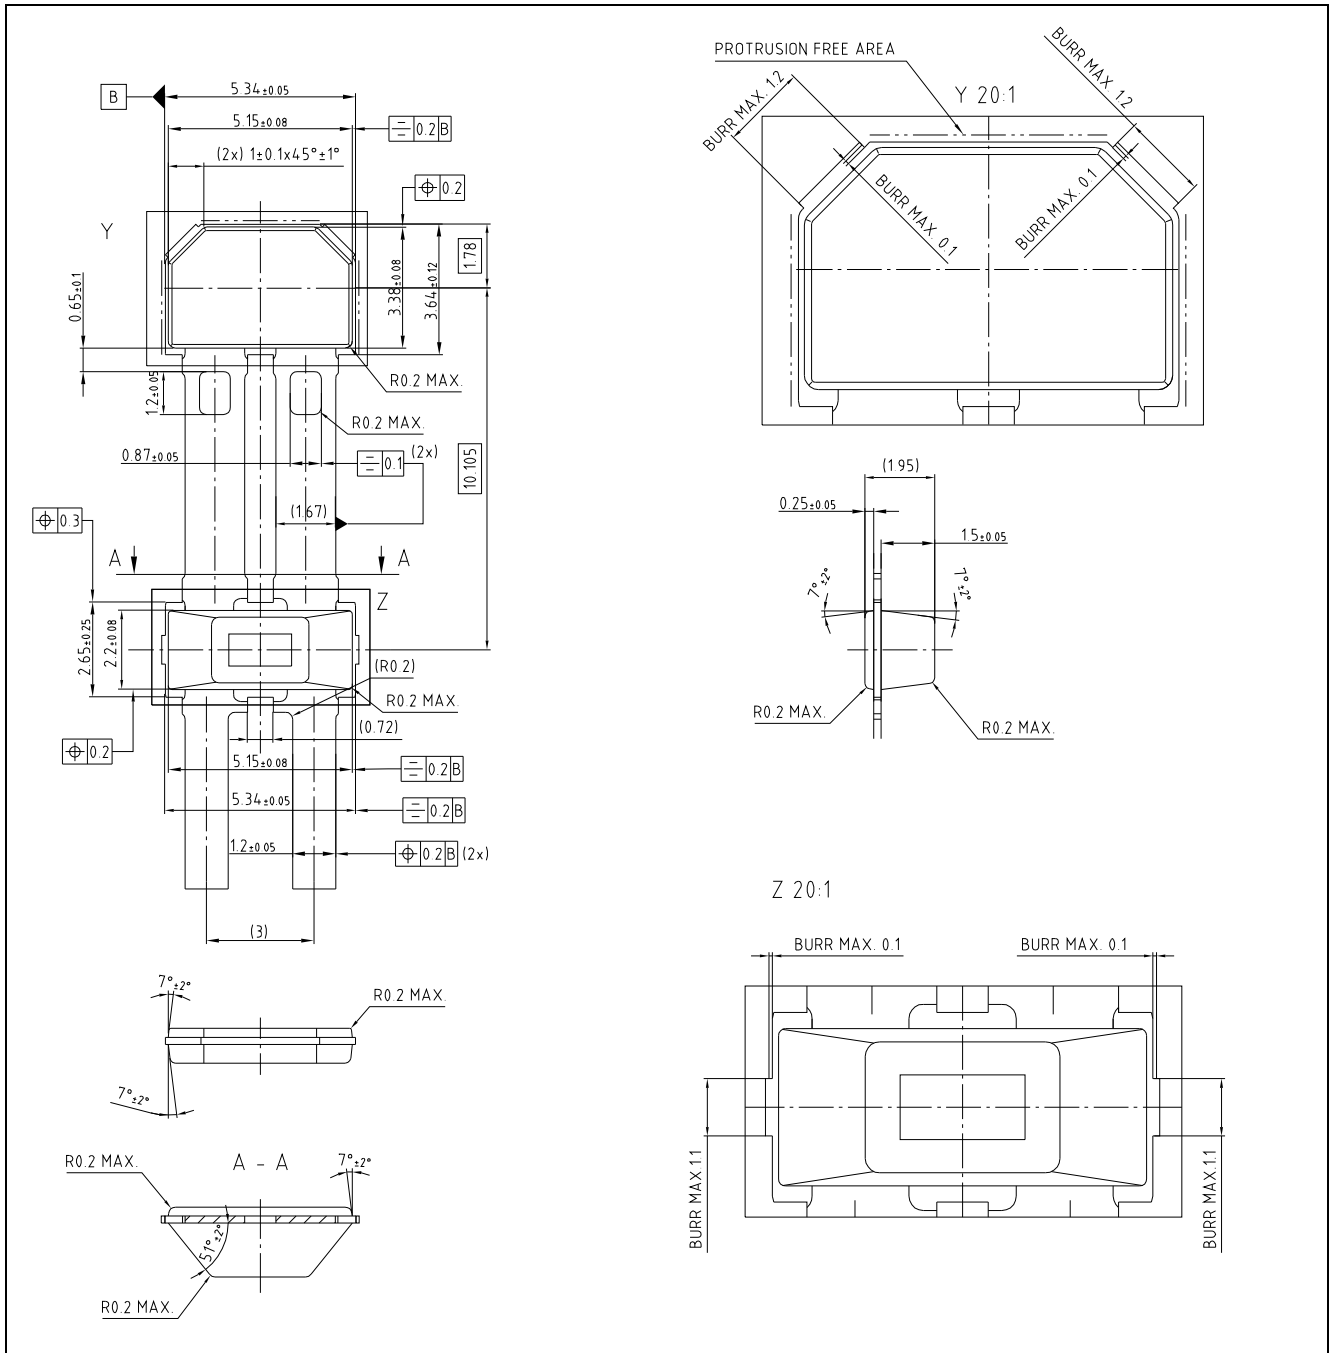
Package Dimensions in mm of PG-SSO-2-53 (Plastic Single Small Outline Package)
